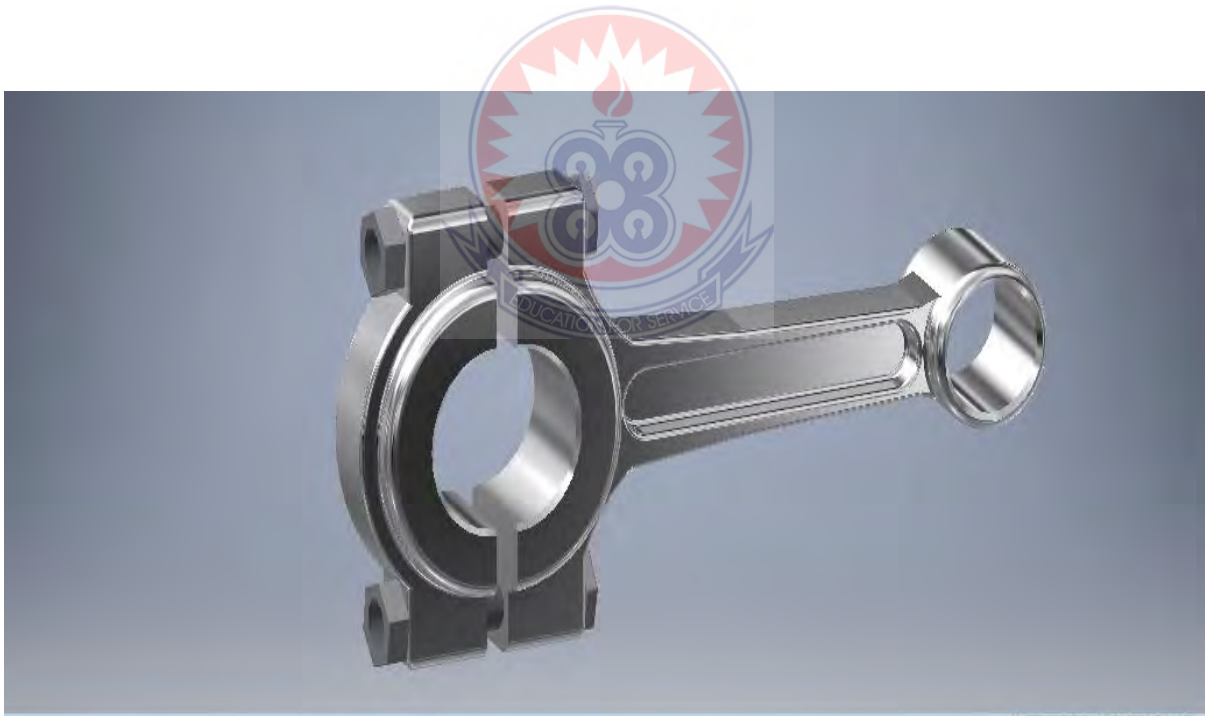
Assembly of the Connecting Rod after Al7075 was Applied
